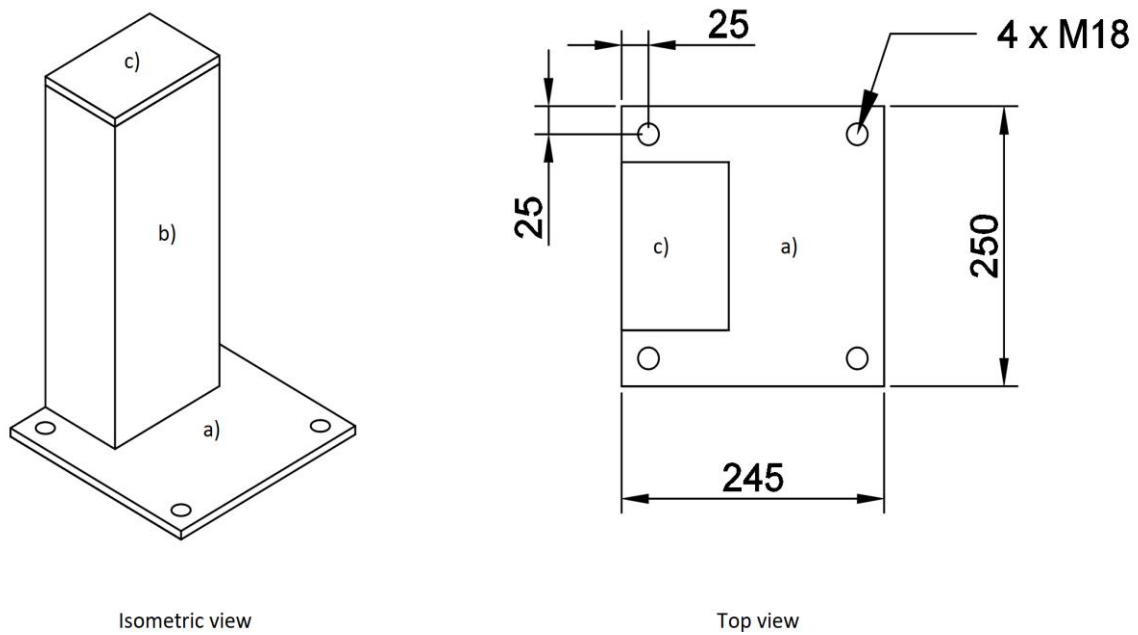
Assembly of the three parts introduced in Figure 52 that will be used for the SISU engine. In the top view, it is specified the positioning of the pieces, the shredded holes, and their dimension. Source (Author's own)
